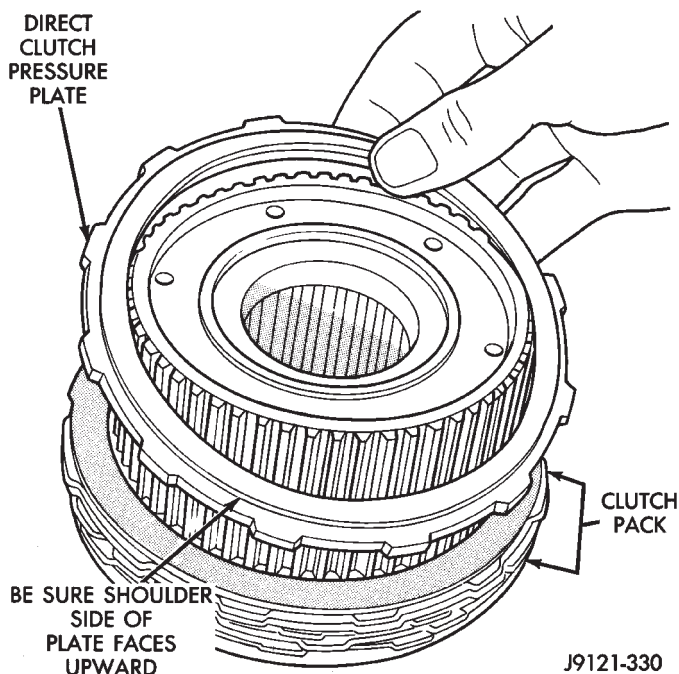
Correct Position Of Direct Clutch Pressure Plate
